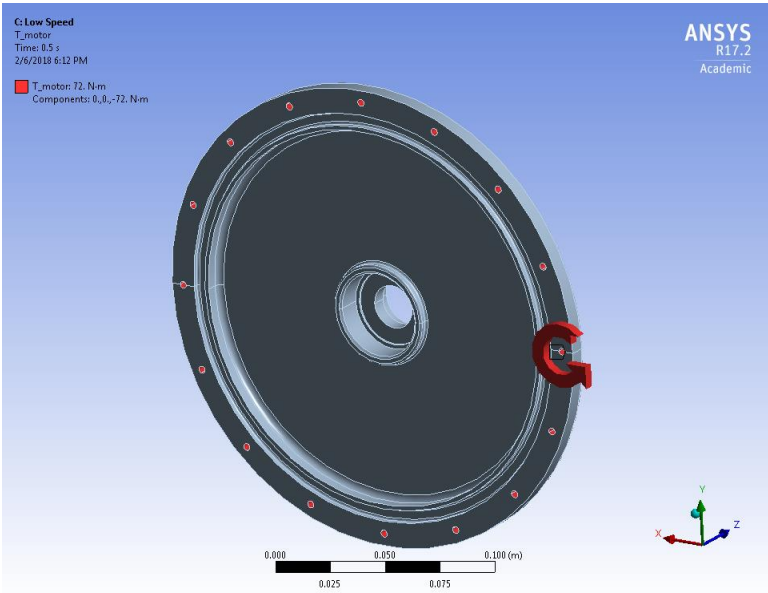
Torque condition - front endcap surfaces (rear endcap similar)
